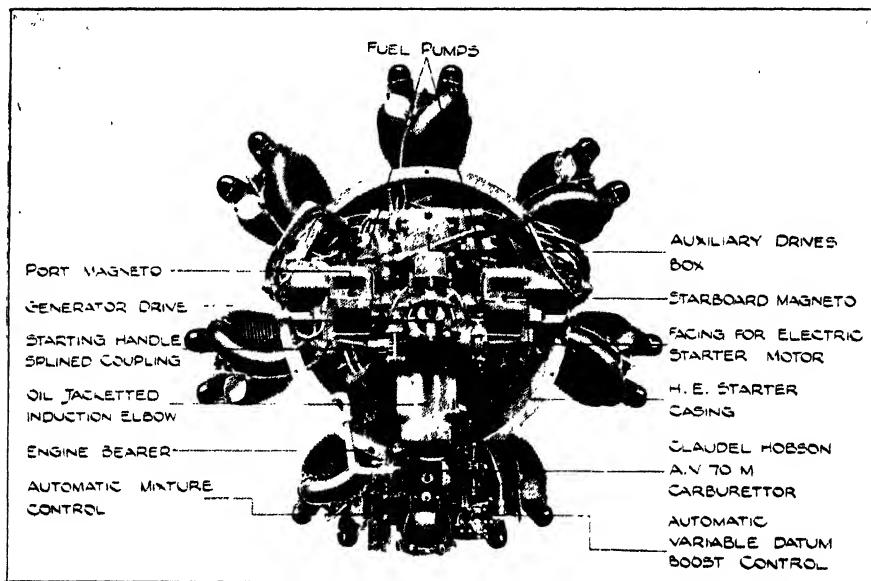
Rear view of engine showing the disposition of the auxiliaries on the rear cover.
